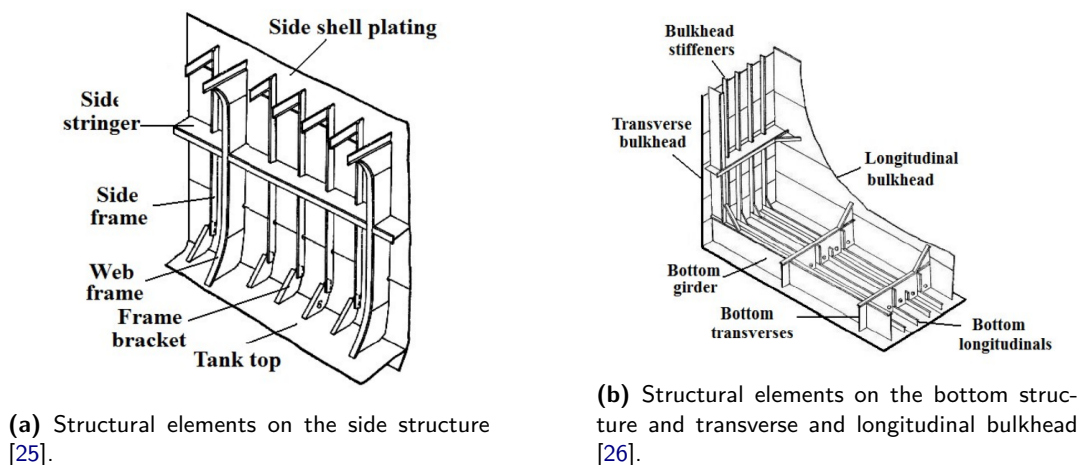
Naming convention of the structural elements of a vessel. Bottom longitudinal is called a stiffener instead.
